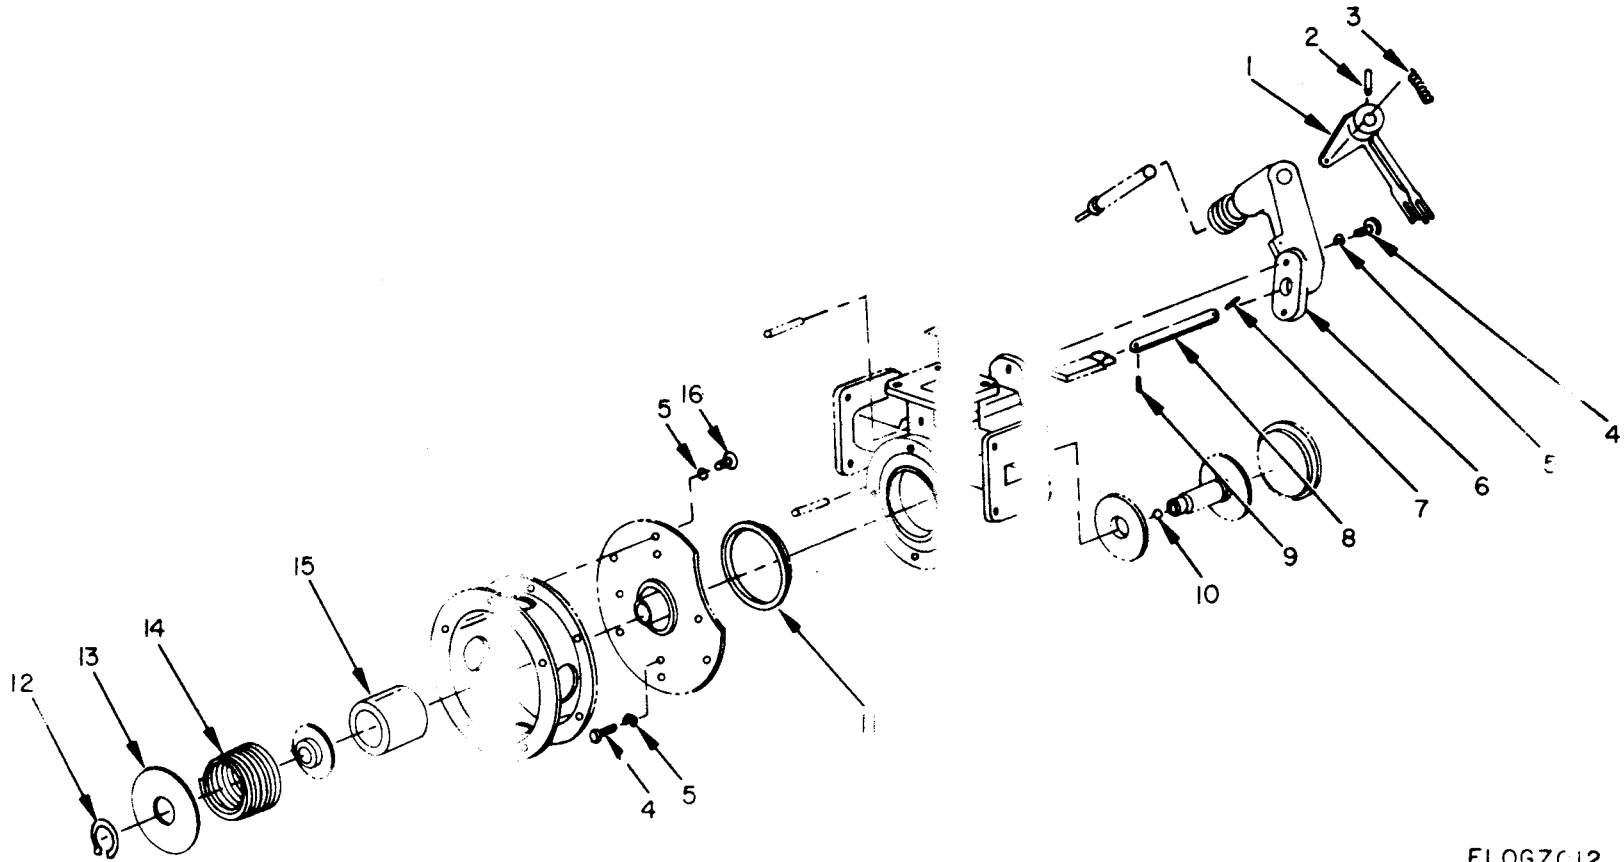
Tee Assembly, Frequency Meter, Exploded View.
